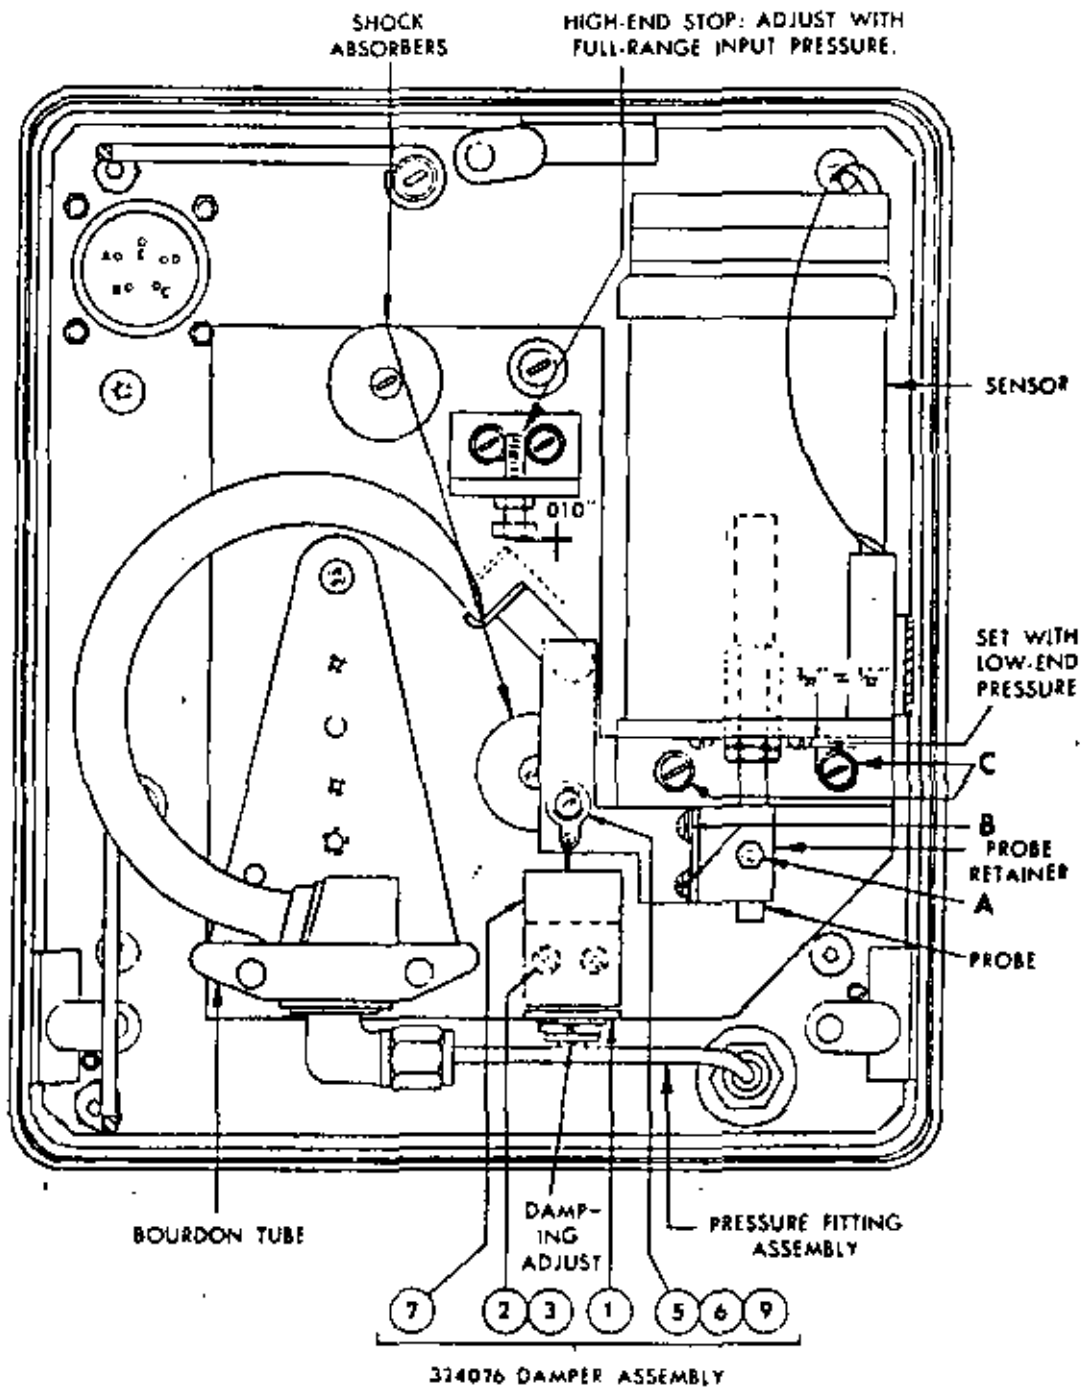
Back-plate assembly of the 1970 Transmitter, showing adjustments.
